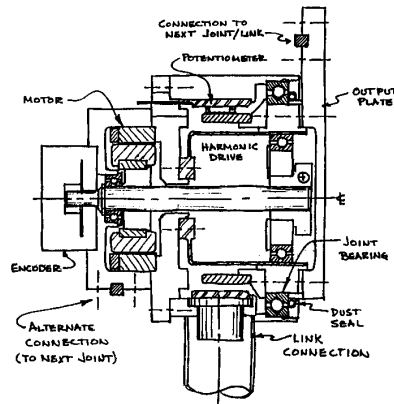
Joint is compact, self-contained, modular design. It includes a DC motor, harmonic drive reducer, position sensors and bearings.
